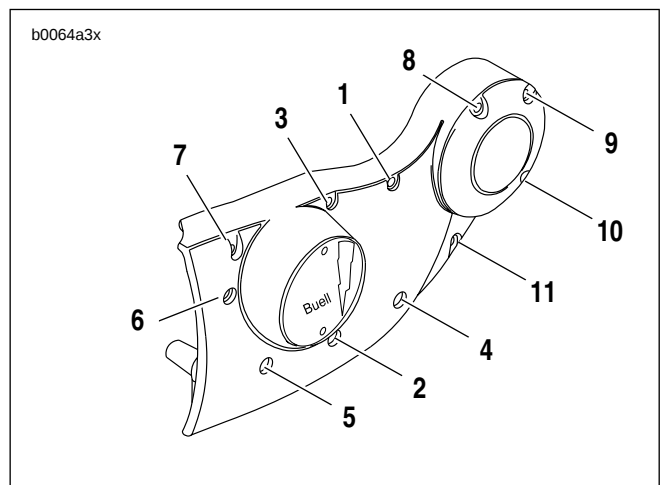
Gearcase Cover Mounting Screw Torque Sequence
